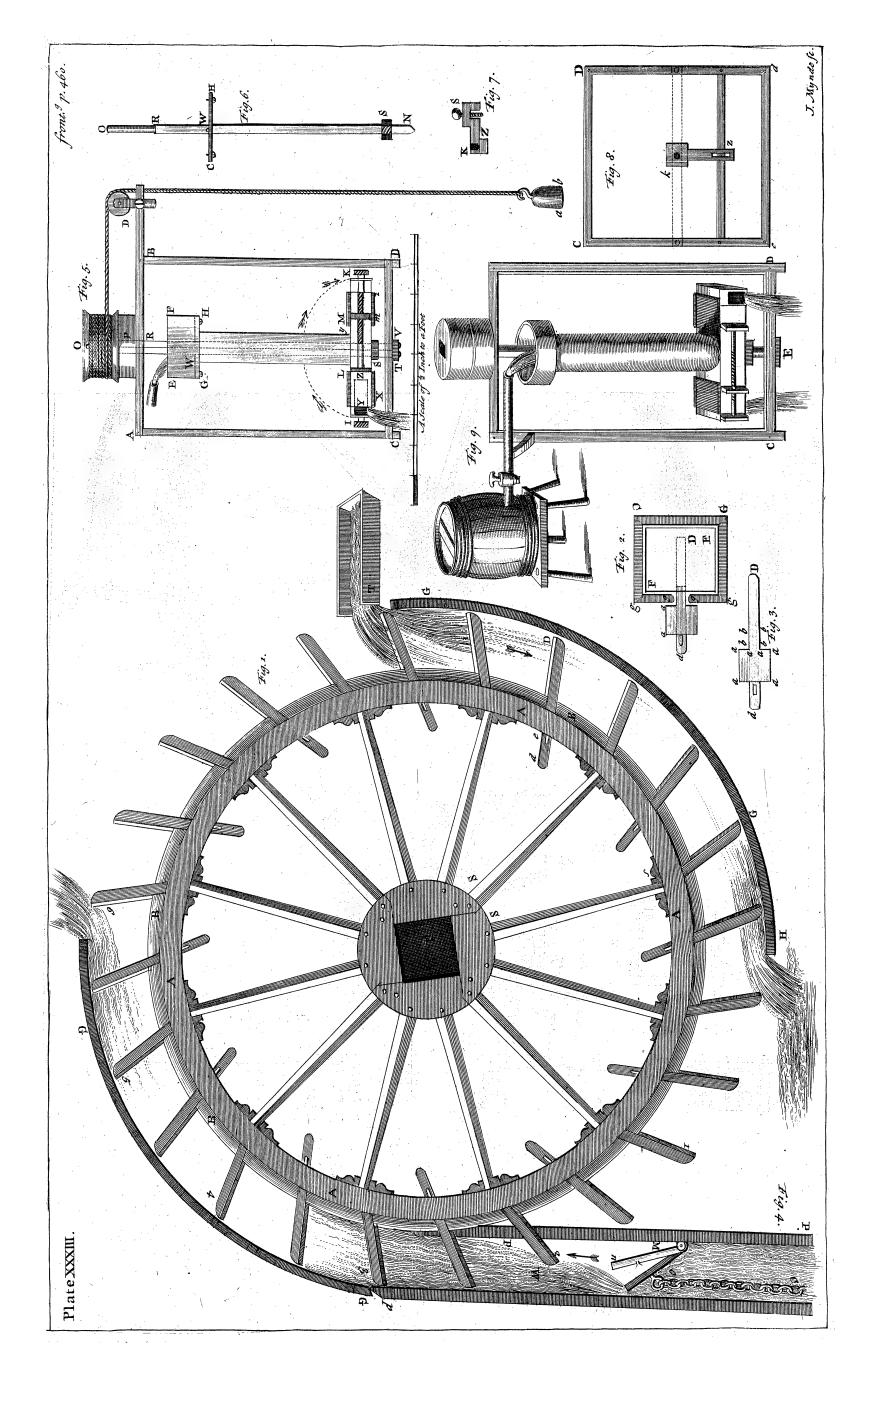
, represents the Piece of Iron fasten'd to the cross horizontal Bir C D. T the Hole for the Pivot to go thro'; V the bearing Piece of Brass, and S the Screw to fix this Iron Arm to the Bar over N, where
